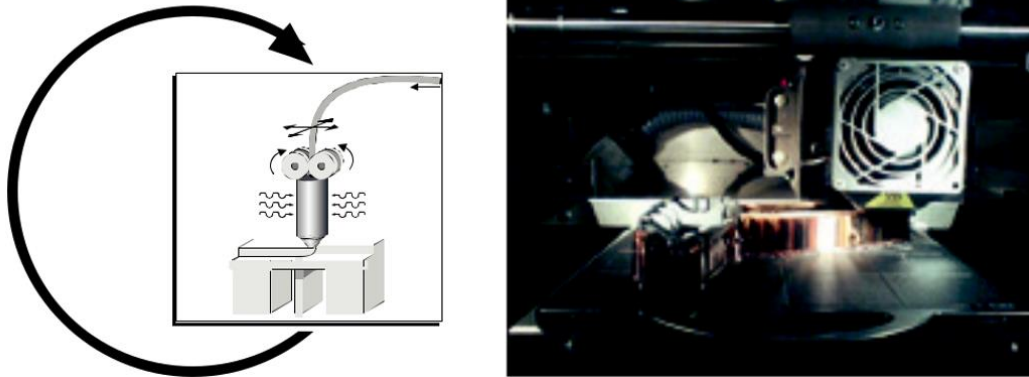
Fused layer modeling extrusion process: scheme (left); build chamber with build platform, part in progress, print head (right).
